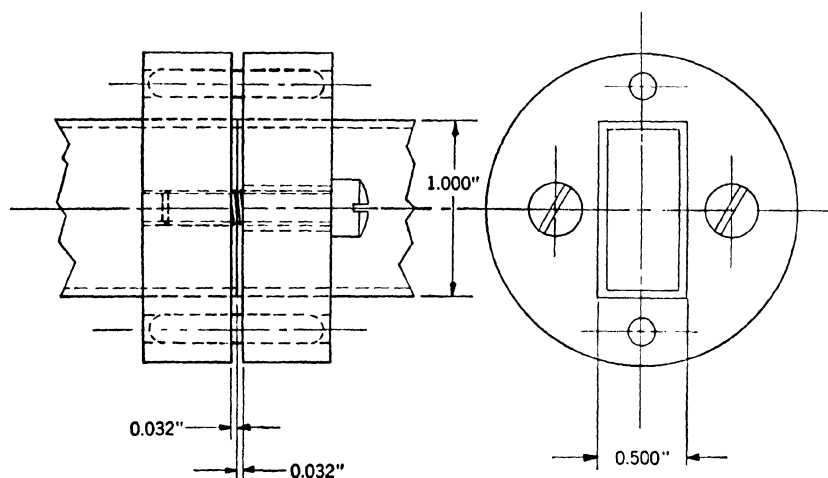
Contact coupling for precise waveguide measurements.
